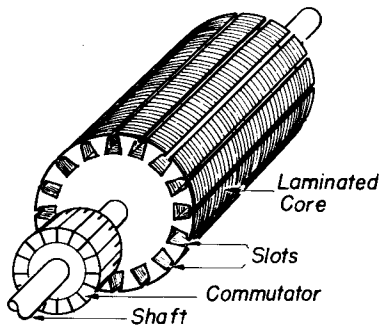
The armature of a d-c motor before windings are inserted in slots.
